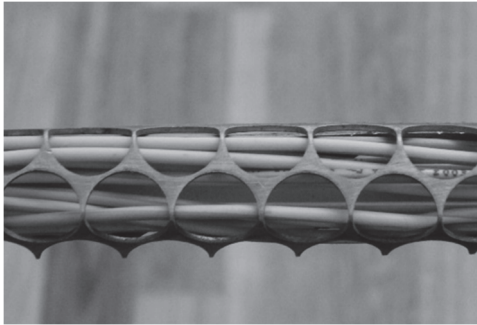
Testing process of perforated steel tube made by Instron 10000 testing machine.
